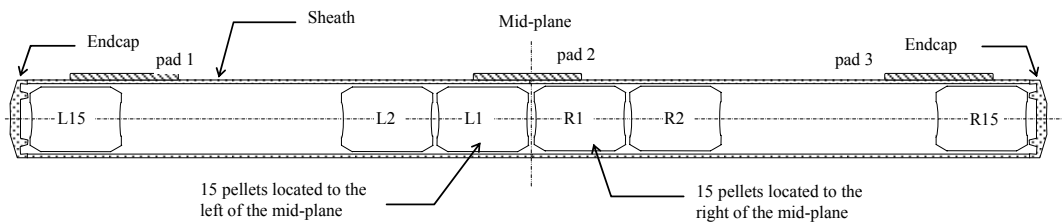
A sectional view of a CANDU fuel element including bearing pads
